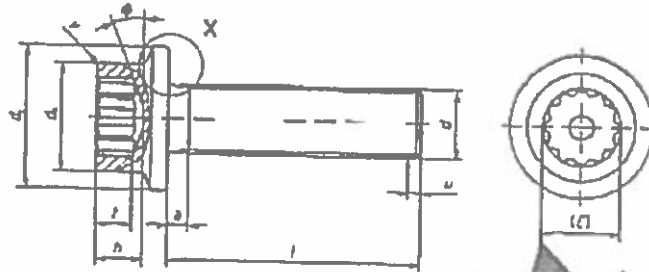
Triple square socket head screws - Cylindrical head with flange
